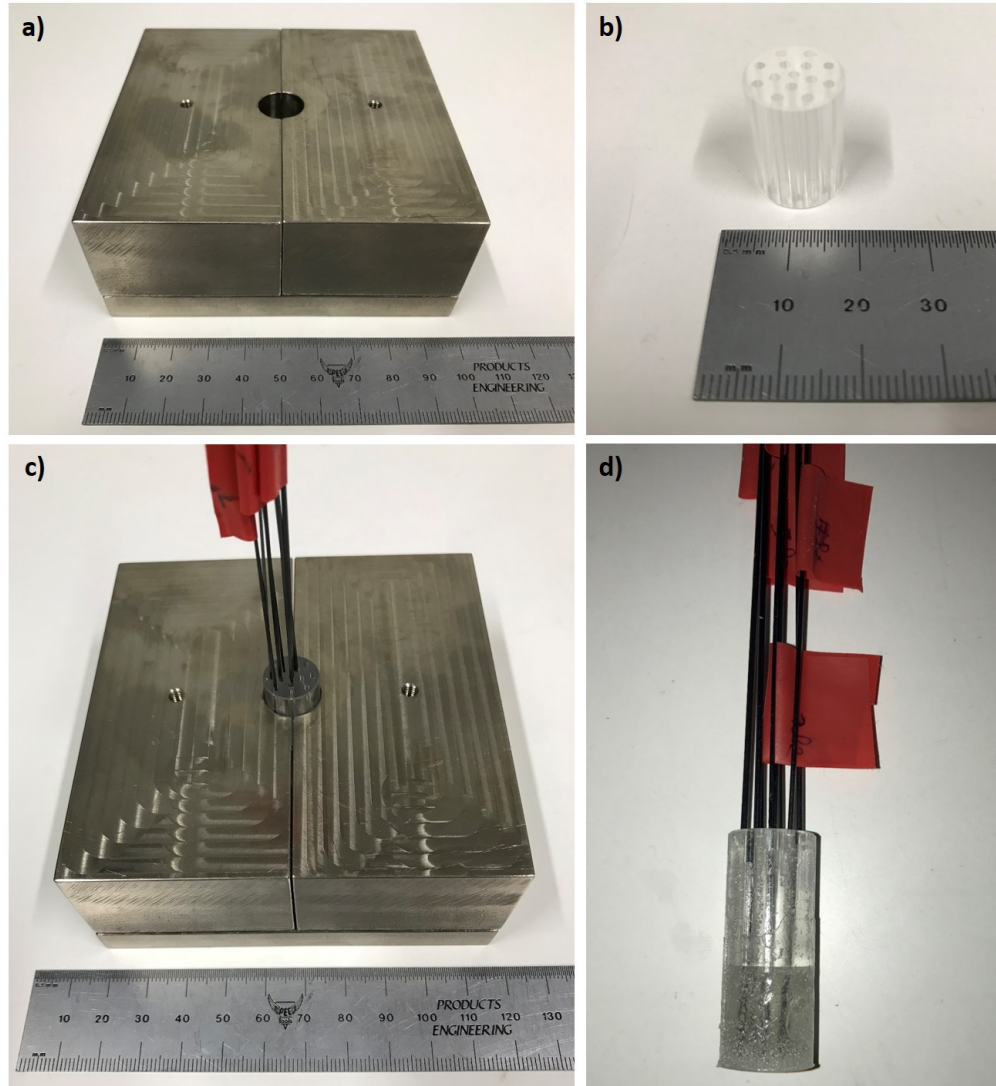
a) Metal holder to mould the fibre bundles for polishing, b) PMMA cylinder with 14 holes, c) fibre bundle moulding in VLST acrylic by using the metal holder and d) fibre bundles moulded in VLST acrylic.
